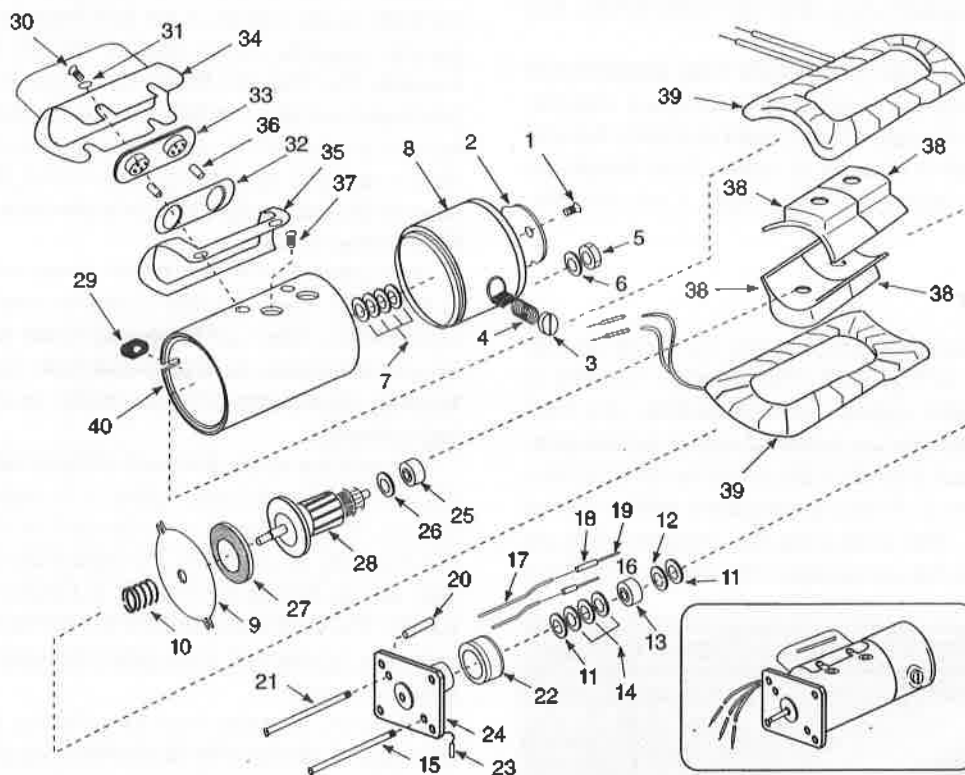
Exploded view of a dc actuator motor: (1) screw, (2) name plate, (3) brush retainer, (4) brush assembly, (5) nut, (6) washer, (7) shim washers, (8) motor cap, (9) brake armature, (10) brake armature spring, (11) spacer washer, (12) shim washer, (13) ball bearing, (14) shim washers, (15) motor assembly stud, (16) insulating sleeve, (17) wire, (18) insulating sleeving, (19) brush connector, (20) insulating sleeving, (21) motor assembly stud, (22) brake-coil assembly, (23) base-registering pin, (24) motor-base assembly, (25) ball bearing, (26) shim washer, (27) brake lining, (28) armature assembly, (29) motor lead grommet, (30) thermal-protector-case screw, (31) washer, (32) thermal-protector retainer, (33) thermal protector, (34) thermal-protector case, (35) thermal-protector gasket, (36) insulating sleeving, (37) field-pole screw, (38) field pole, (39) field winding, (40) motor housing.
